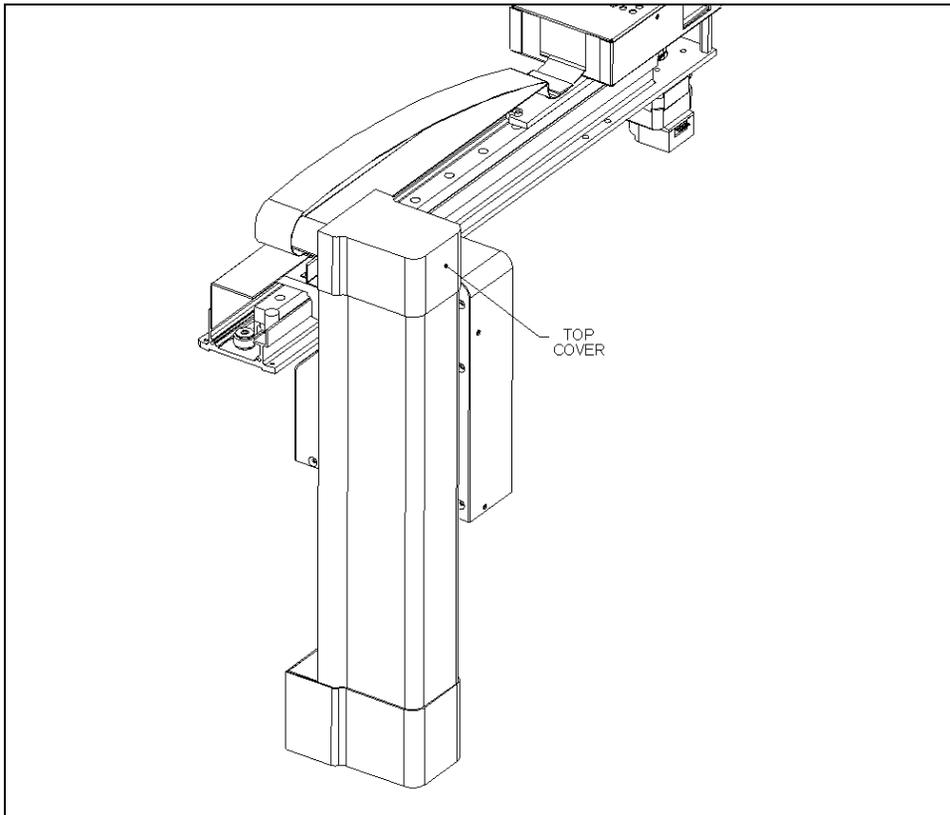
Z-Axis Drive Assembly: Top Cover
